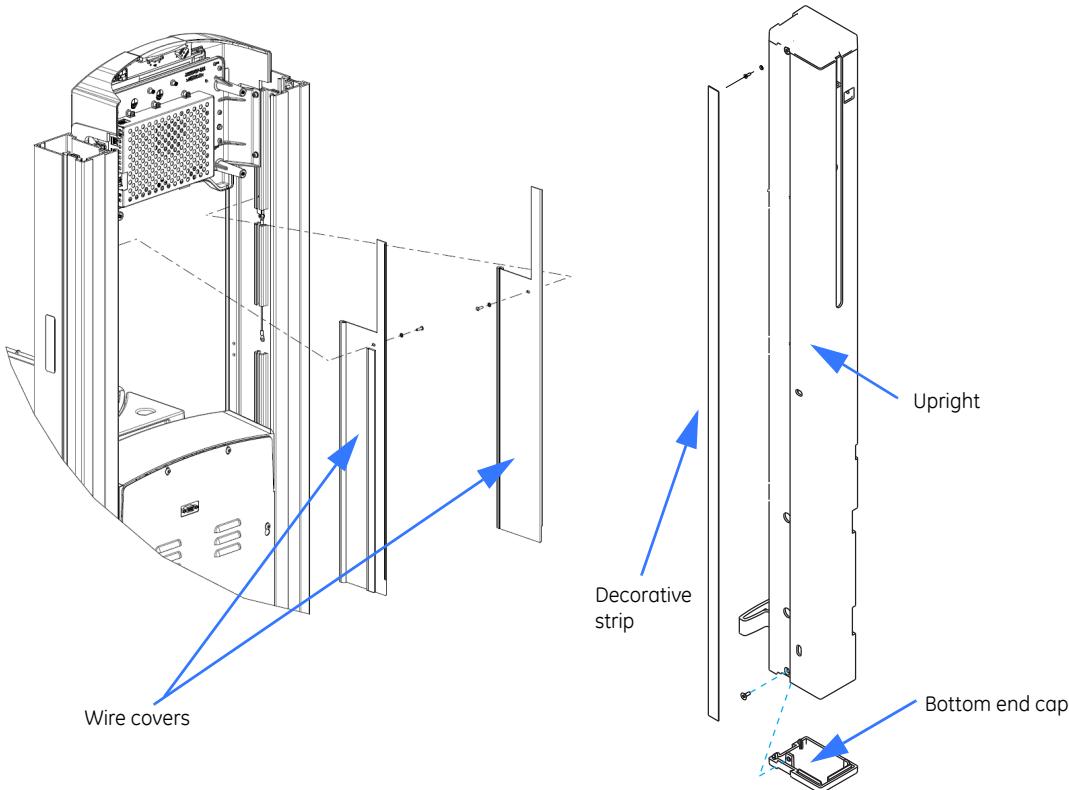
Rail Decorative Strips, End Caps, and Wire Cover
